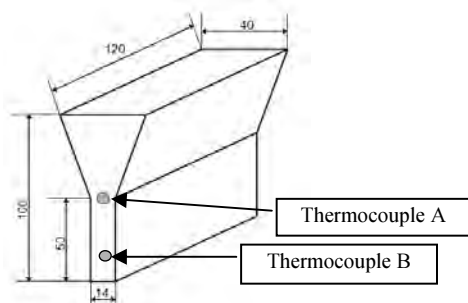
Shape of ceramic mould and places marking location of thermocouples A and B
